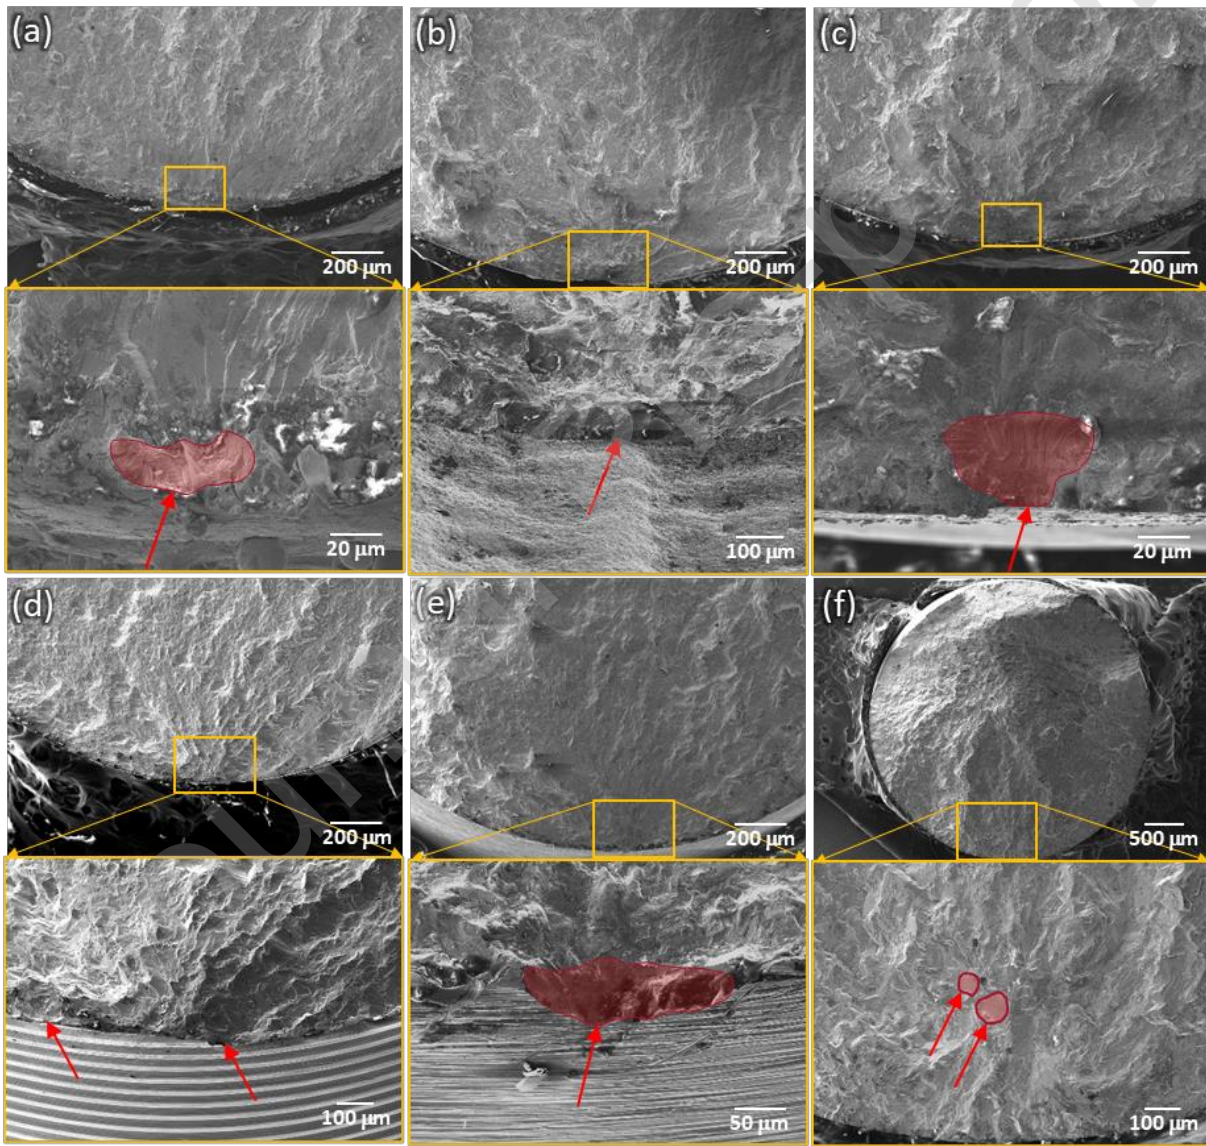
Fracture surfaces of specimens in each surface condition: (a) AB, (b) SB, (c) DF, (d) T, (e) G, and (f) GDF
